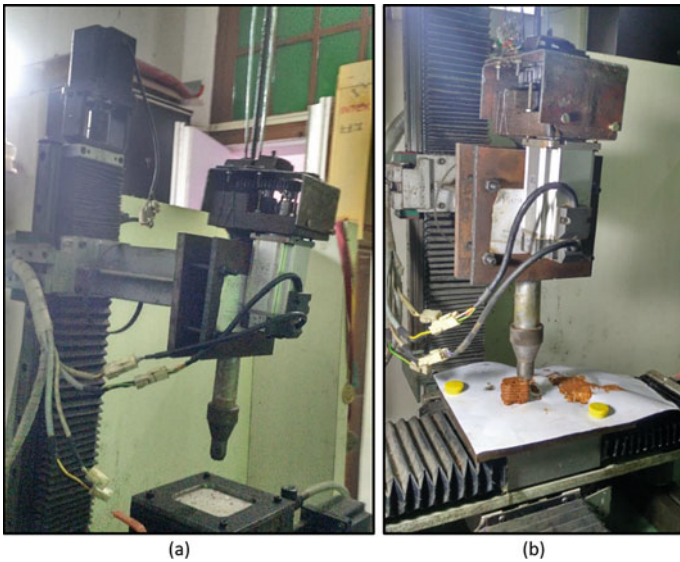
a 3D printing attachment mounted on CNC machine, and b Clay 3D printing of a model
